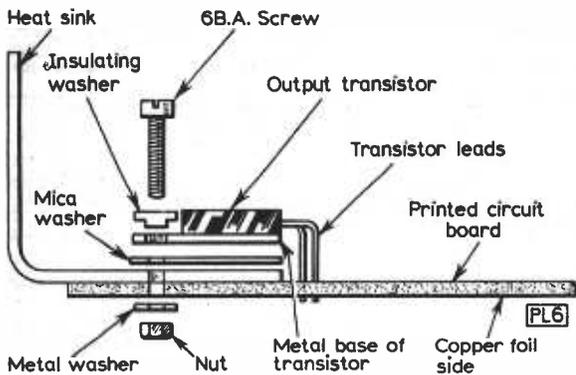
Side elevation showing exploded view of power output transistor mounting (see text).
